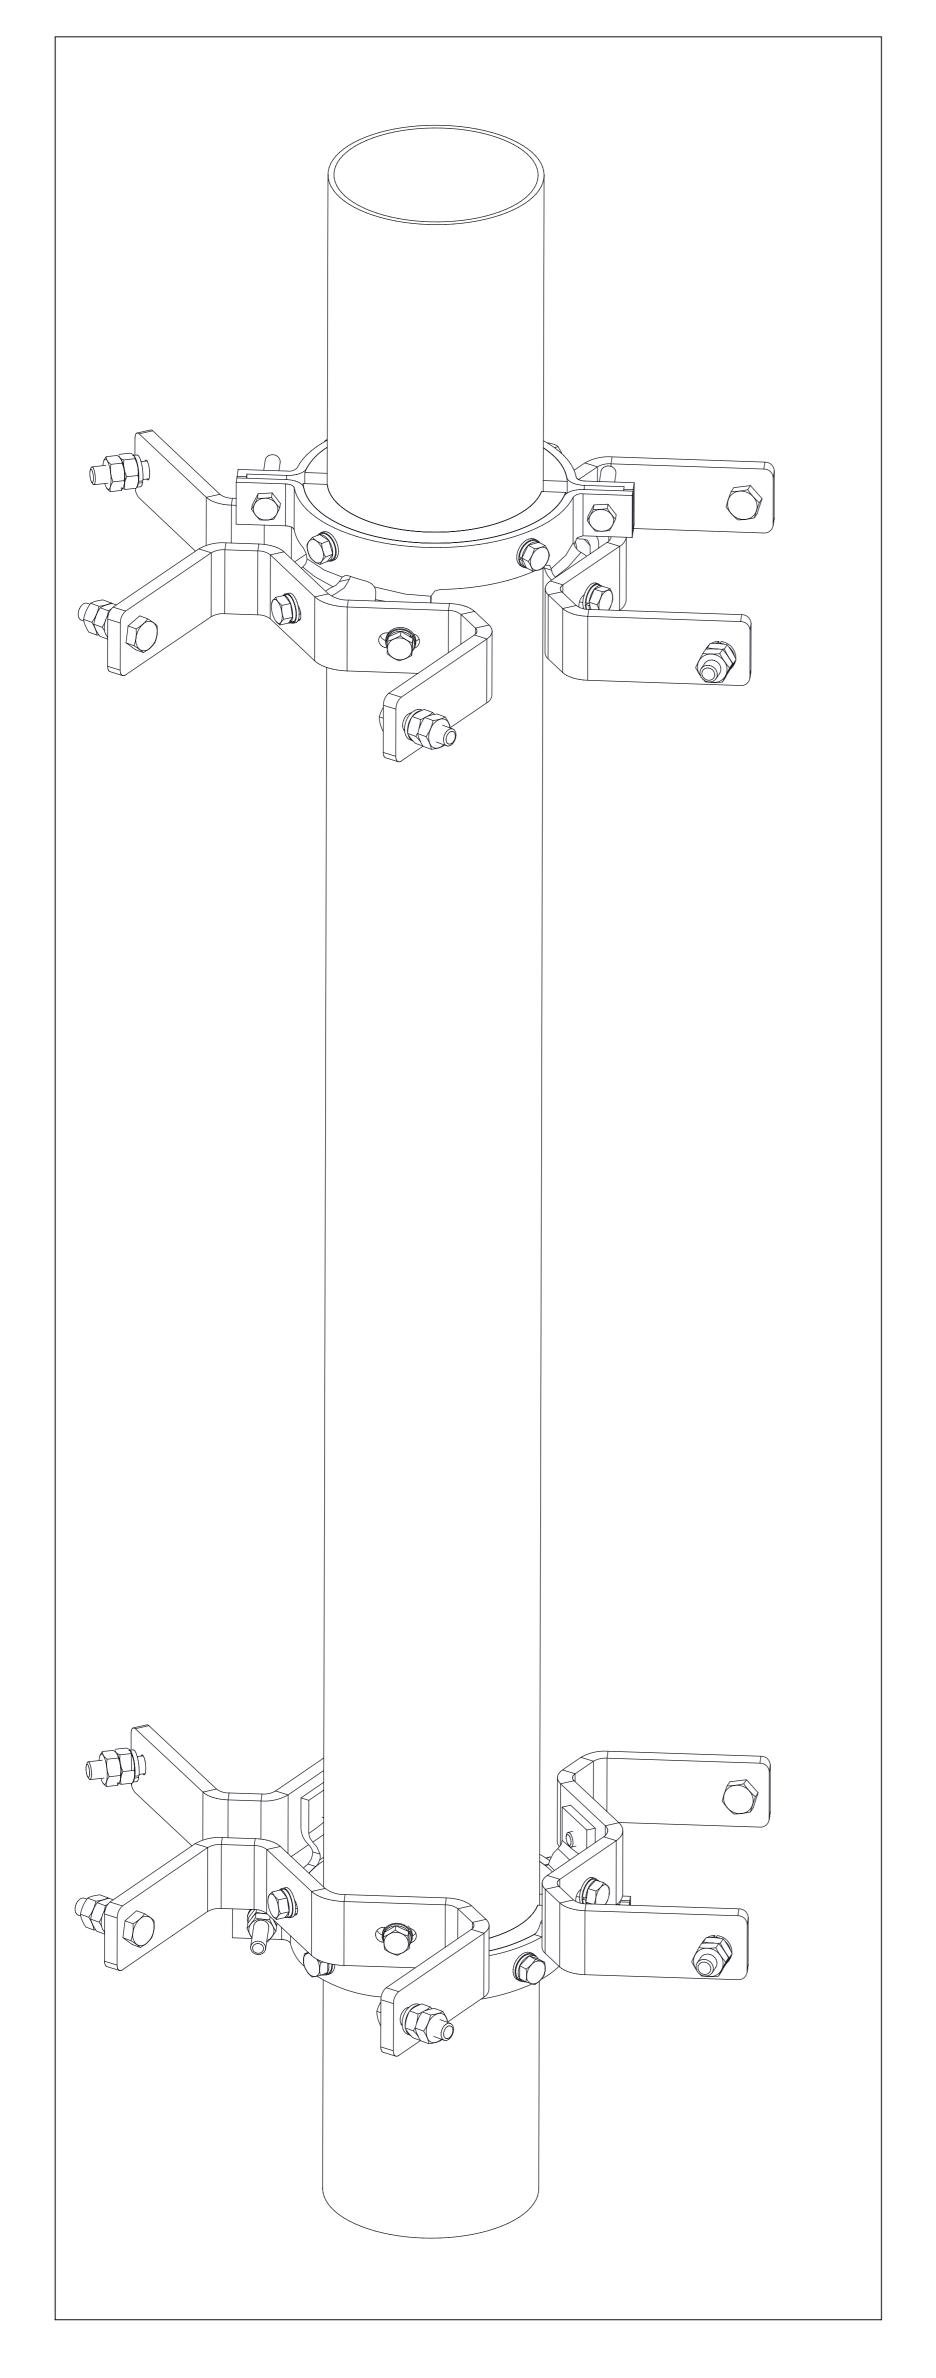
Top and Bottom Hardware Assembly for 114.3mm(4.5") Pole.
